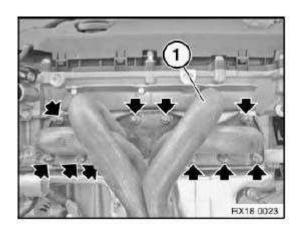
Locating Exhaust Manifold Nuts Courtesy of BMW OF NORTH AMERICA, INC.
